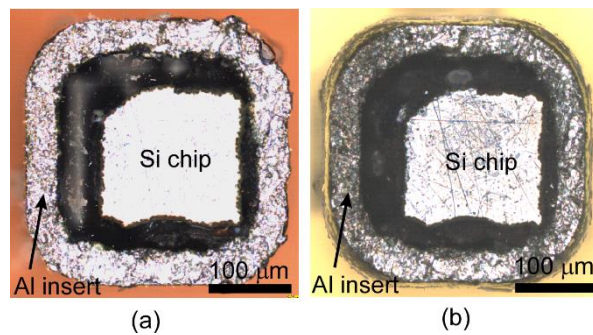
Photos of (a) an Al insert before micro-crimping, with a Si chip integrated by the batch mode method; (b) the same Al insert with the Si chip disassembled from the package after a 200 MPa high pressure test. No damage on the Si chip was observed.
